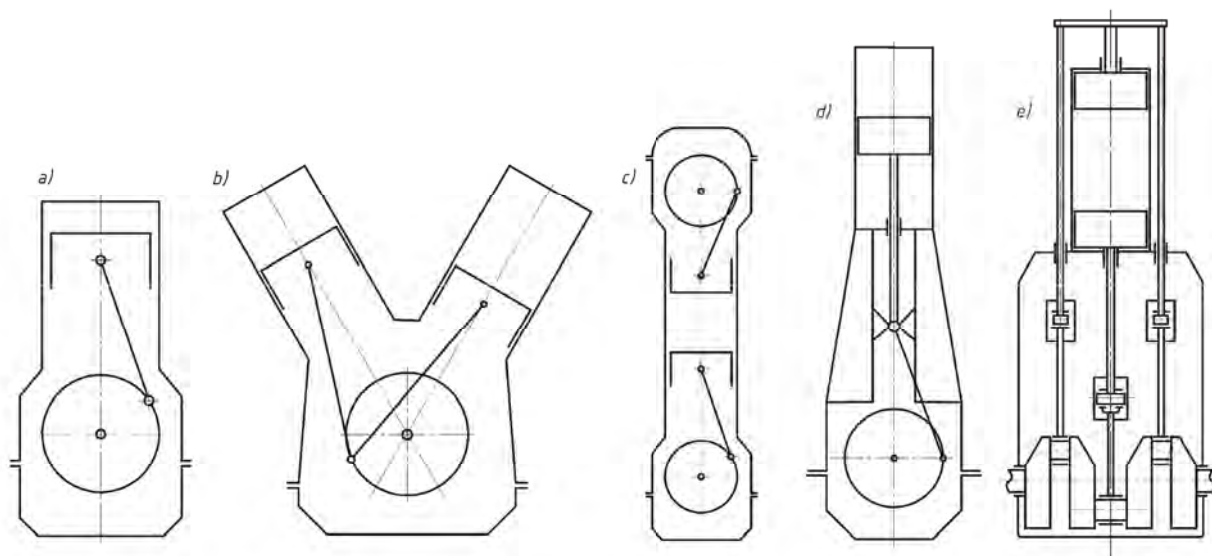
Architectural forms of marine internal combustion engines: *a* – trunk engines in-line; *b* – trunk engines V-shaped; *c* – trunk engines with oppositely moving pistons; *d* – crosshead piston engines; *e* – crosshead engines with oppositely moving pistons
